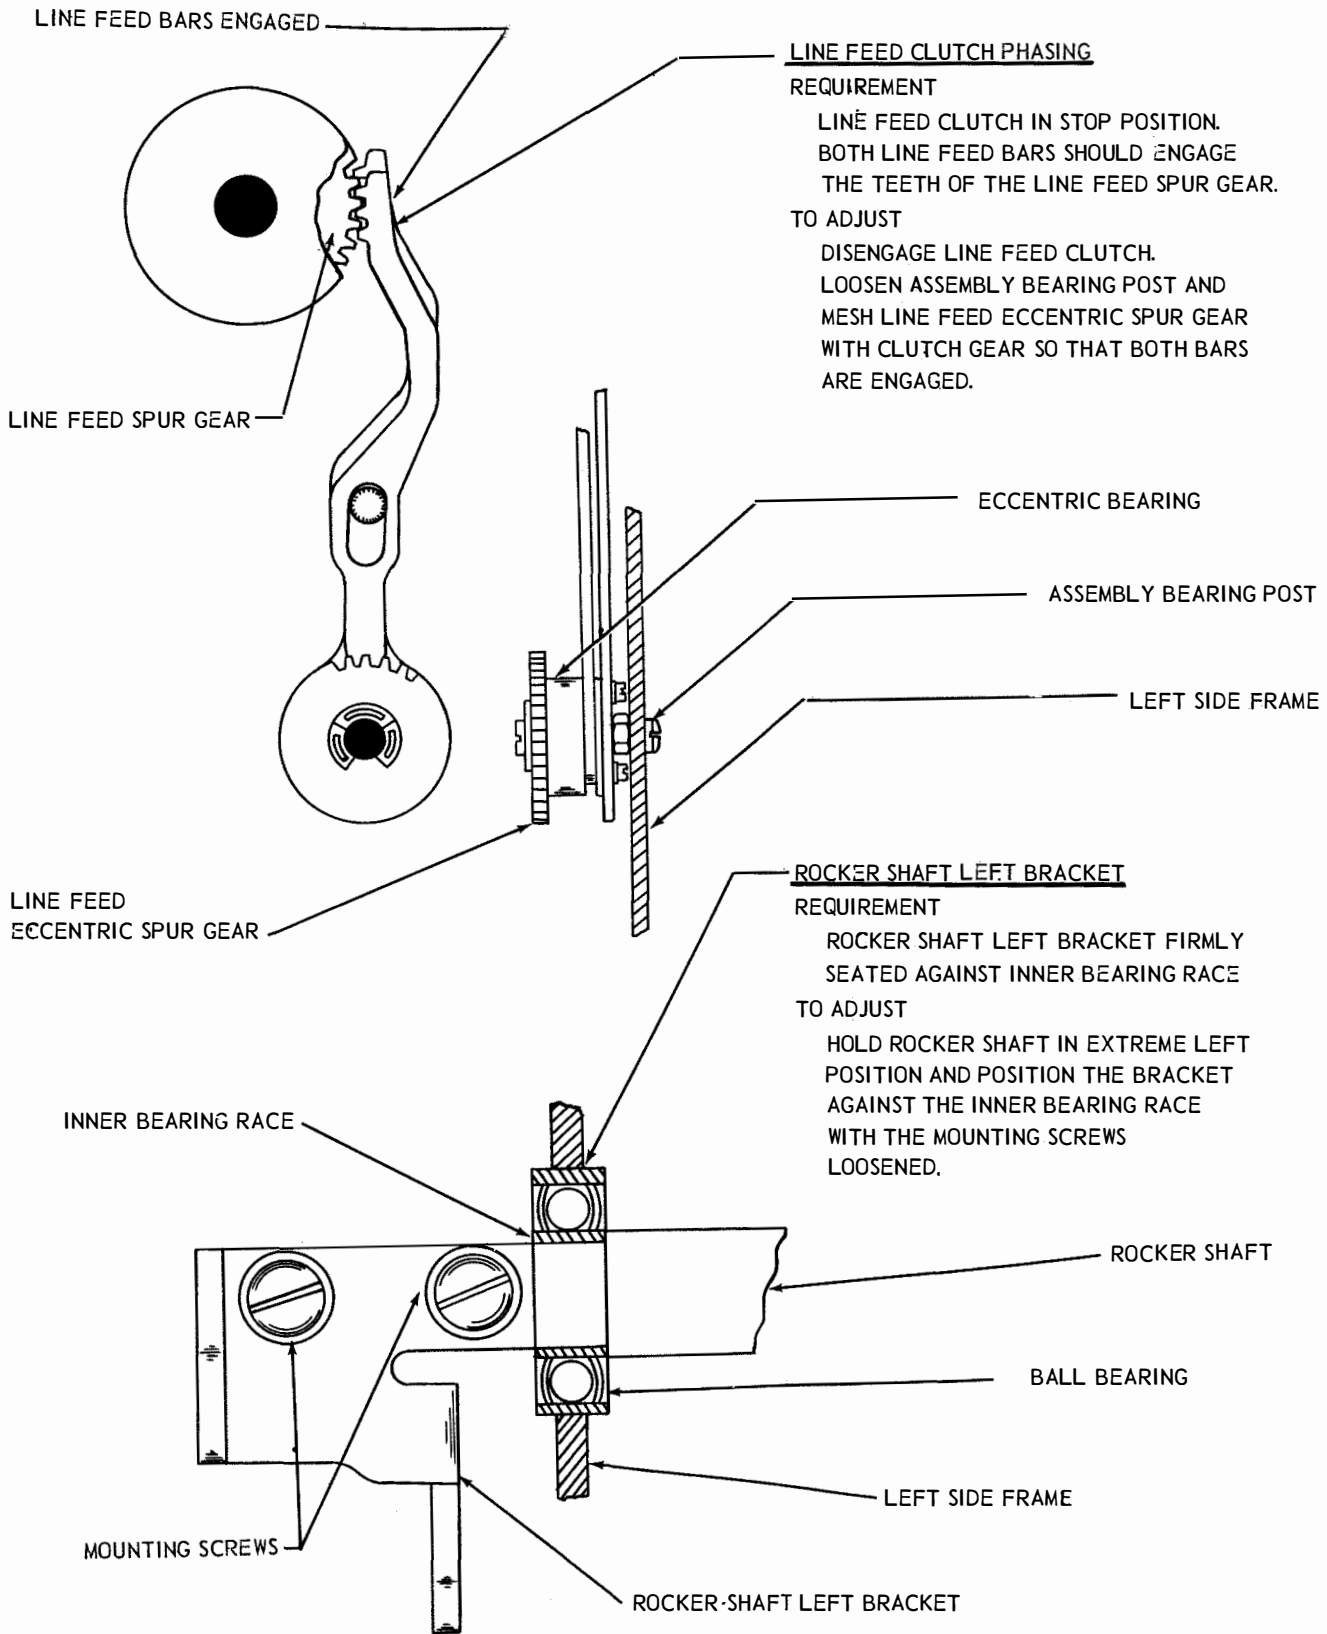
TYPEWRITER, LINE FEED AND ROCKER SHAFT MECHANISM
